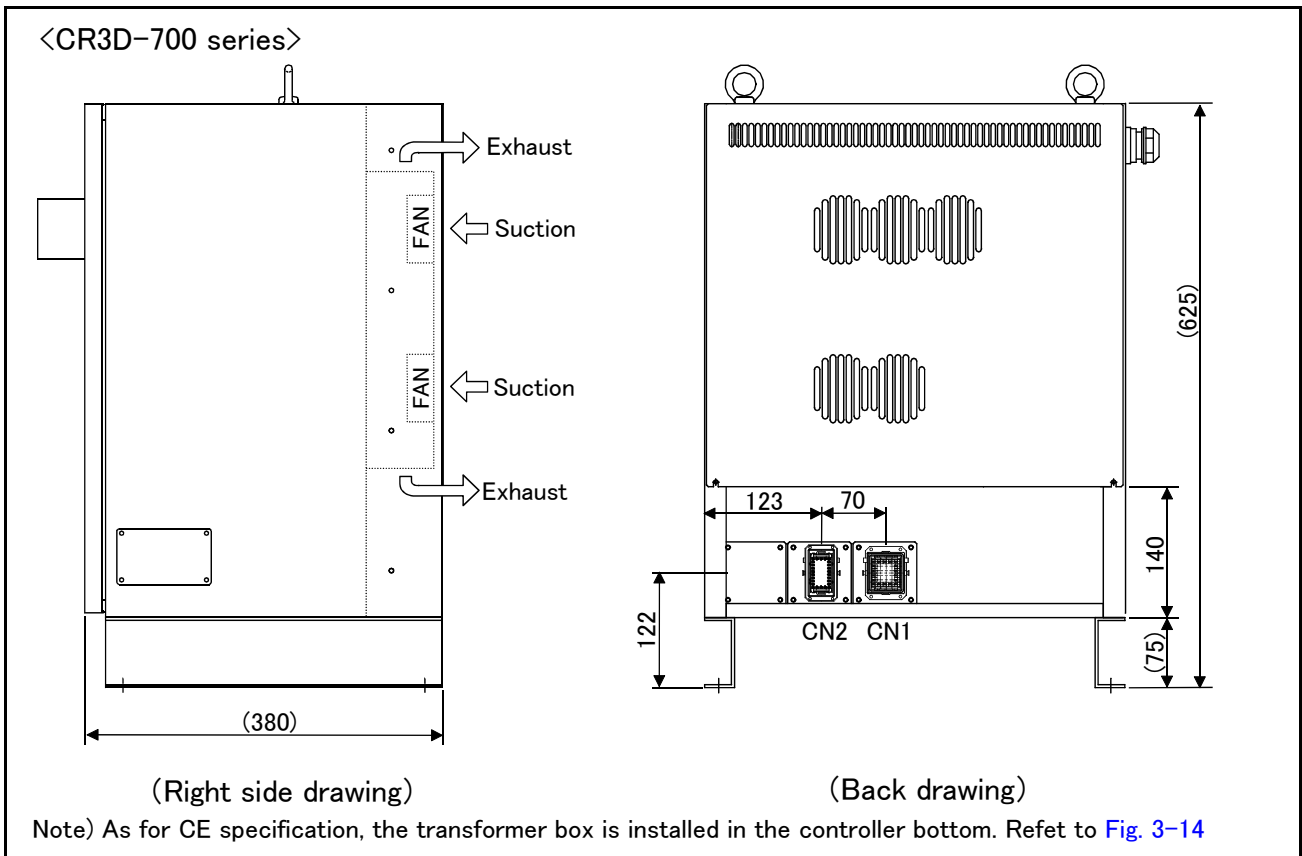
Outside dimensions of controller (CR3D-700 Supplement)
